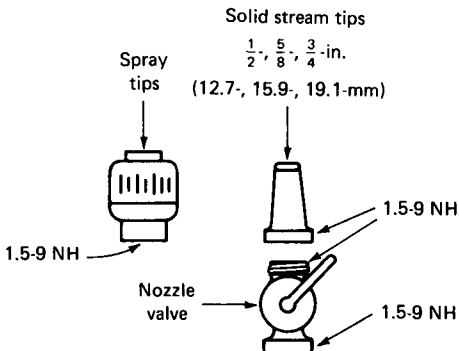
Nozzle assembly for 1½-in. (38-mm) hose.
